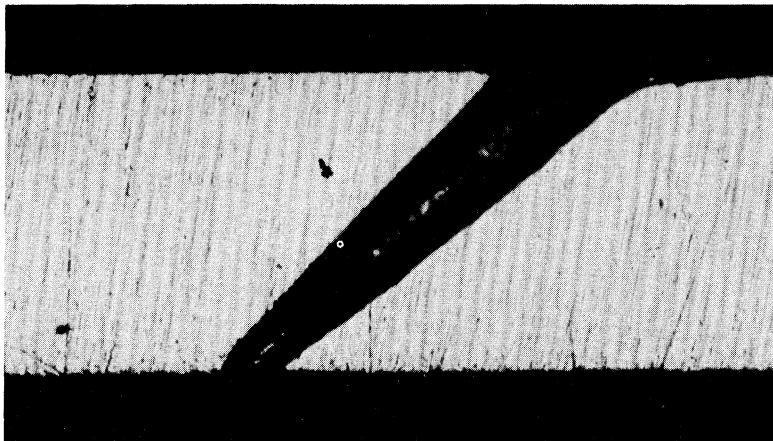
Cross section of hole drilled by electrojet at 45° angle.
